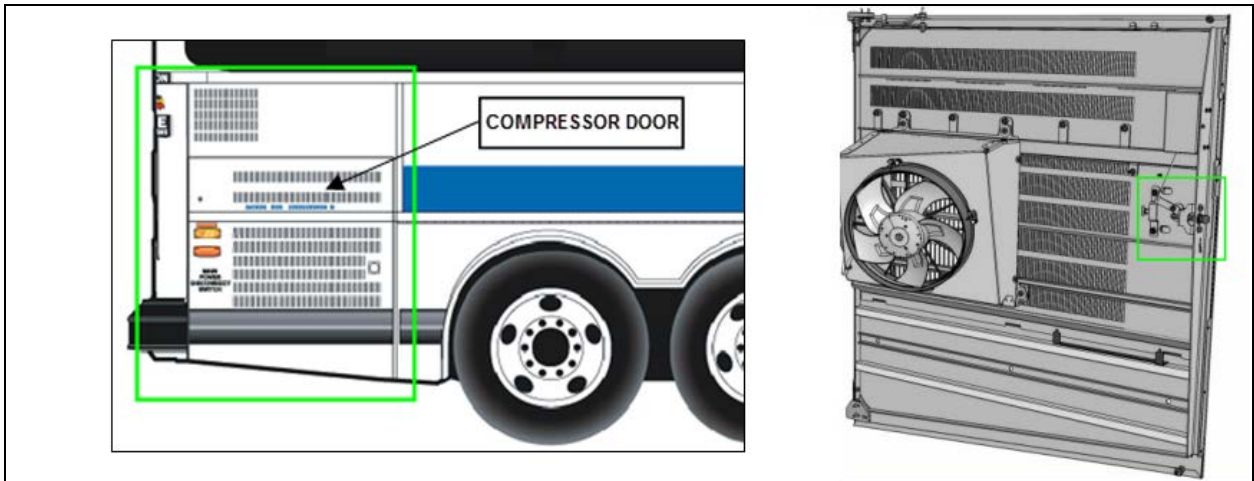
COMPRESSOR DOOR LATCH MECHANISM
